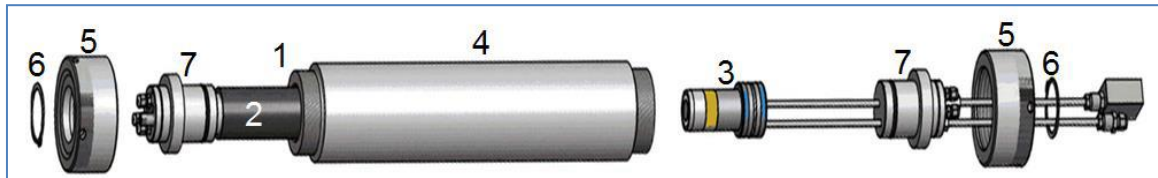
Illustration of the various sections of the core holder wherein the coreplug is first placed in a rubber hose (1) and then connected to a fixed head assembly (2) and a movable head assembly (3) into the pressure sleeve (4). Two union nuts (5) and retaining rings (6) keep the shafts (7) locked in the closed position.
